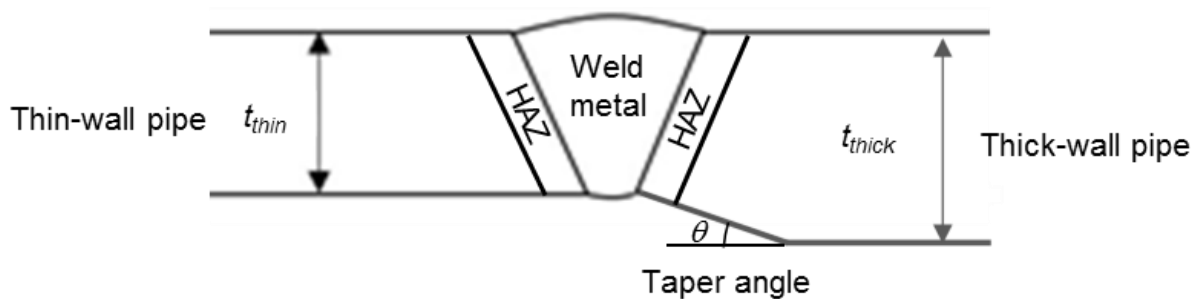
Joint design of transition welds - back-beveled design
